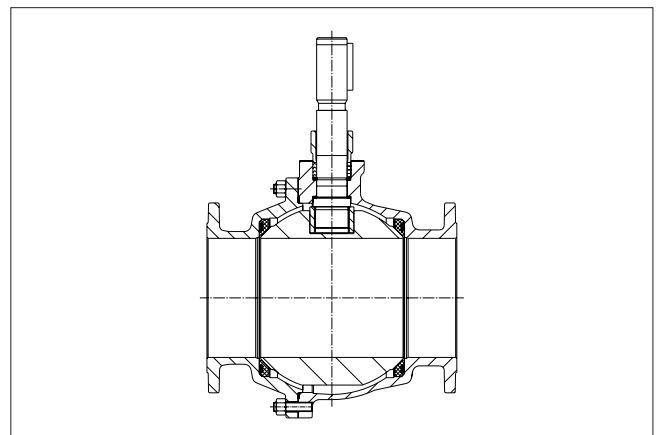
Construction, sizes DN 250/10" and DN 300/12", seat supported ball
